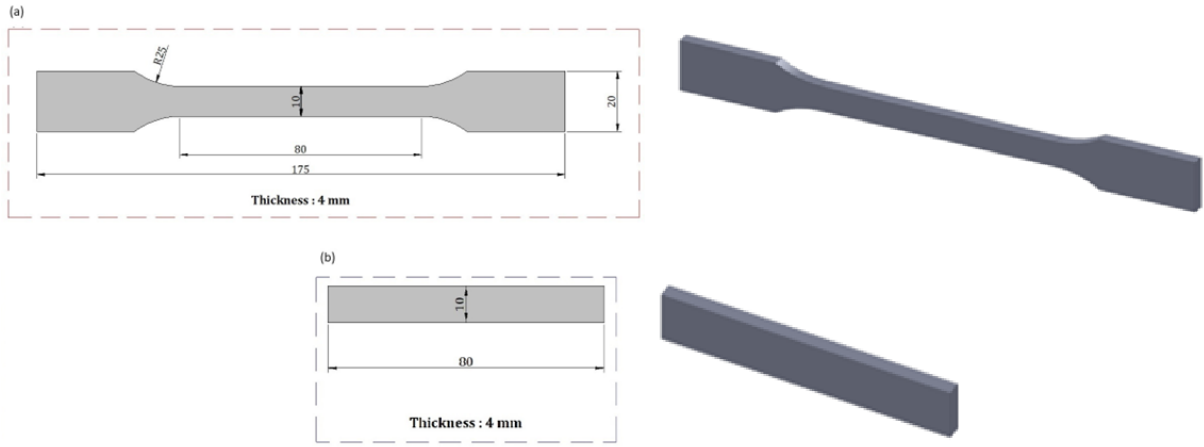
Dimensions for (a) tensile and (b) three-point flexural specimens (units are in mm) ((a) çekme ve (b) üç noktalı eğme numunelerinin boyutları (birimler mm cinsindedir))
